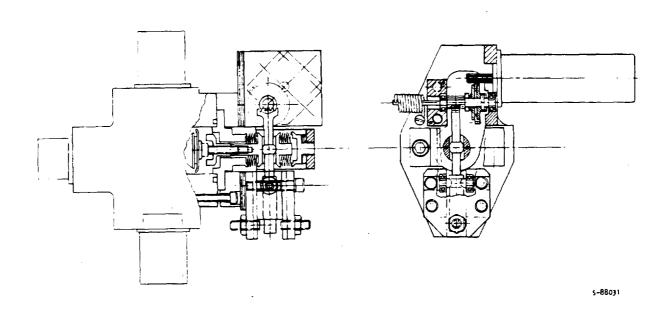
Layout Electric Motor-Driven H₂ Flow Valve.
